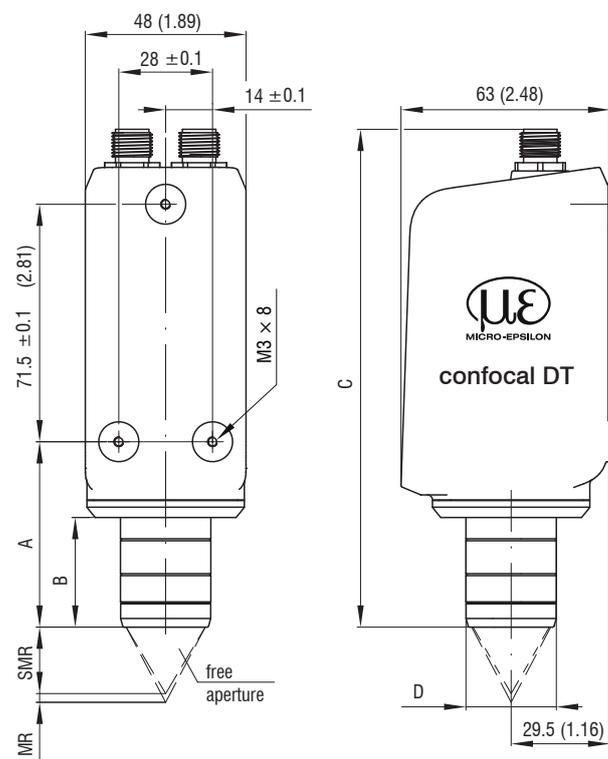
Dimensional drawing IFD2410 | IFD2415, dimensions in mm
